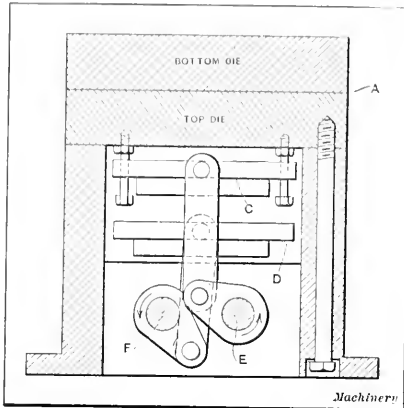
Diagrammatical View showing Arrangement of Mold for Die Casting
